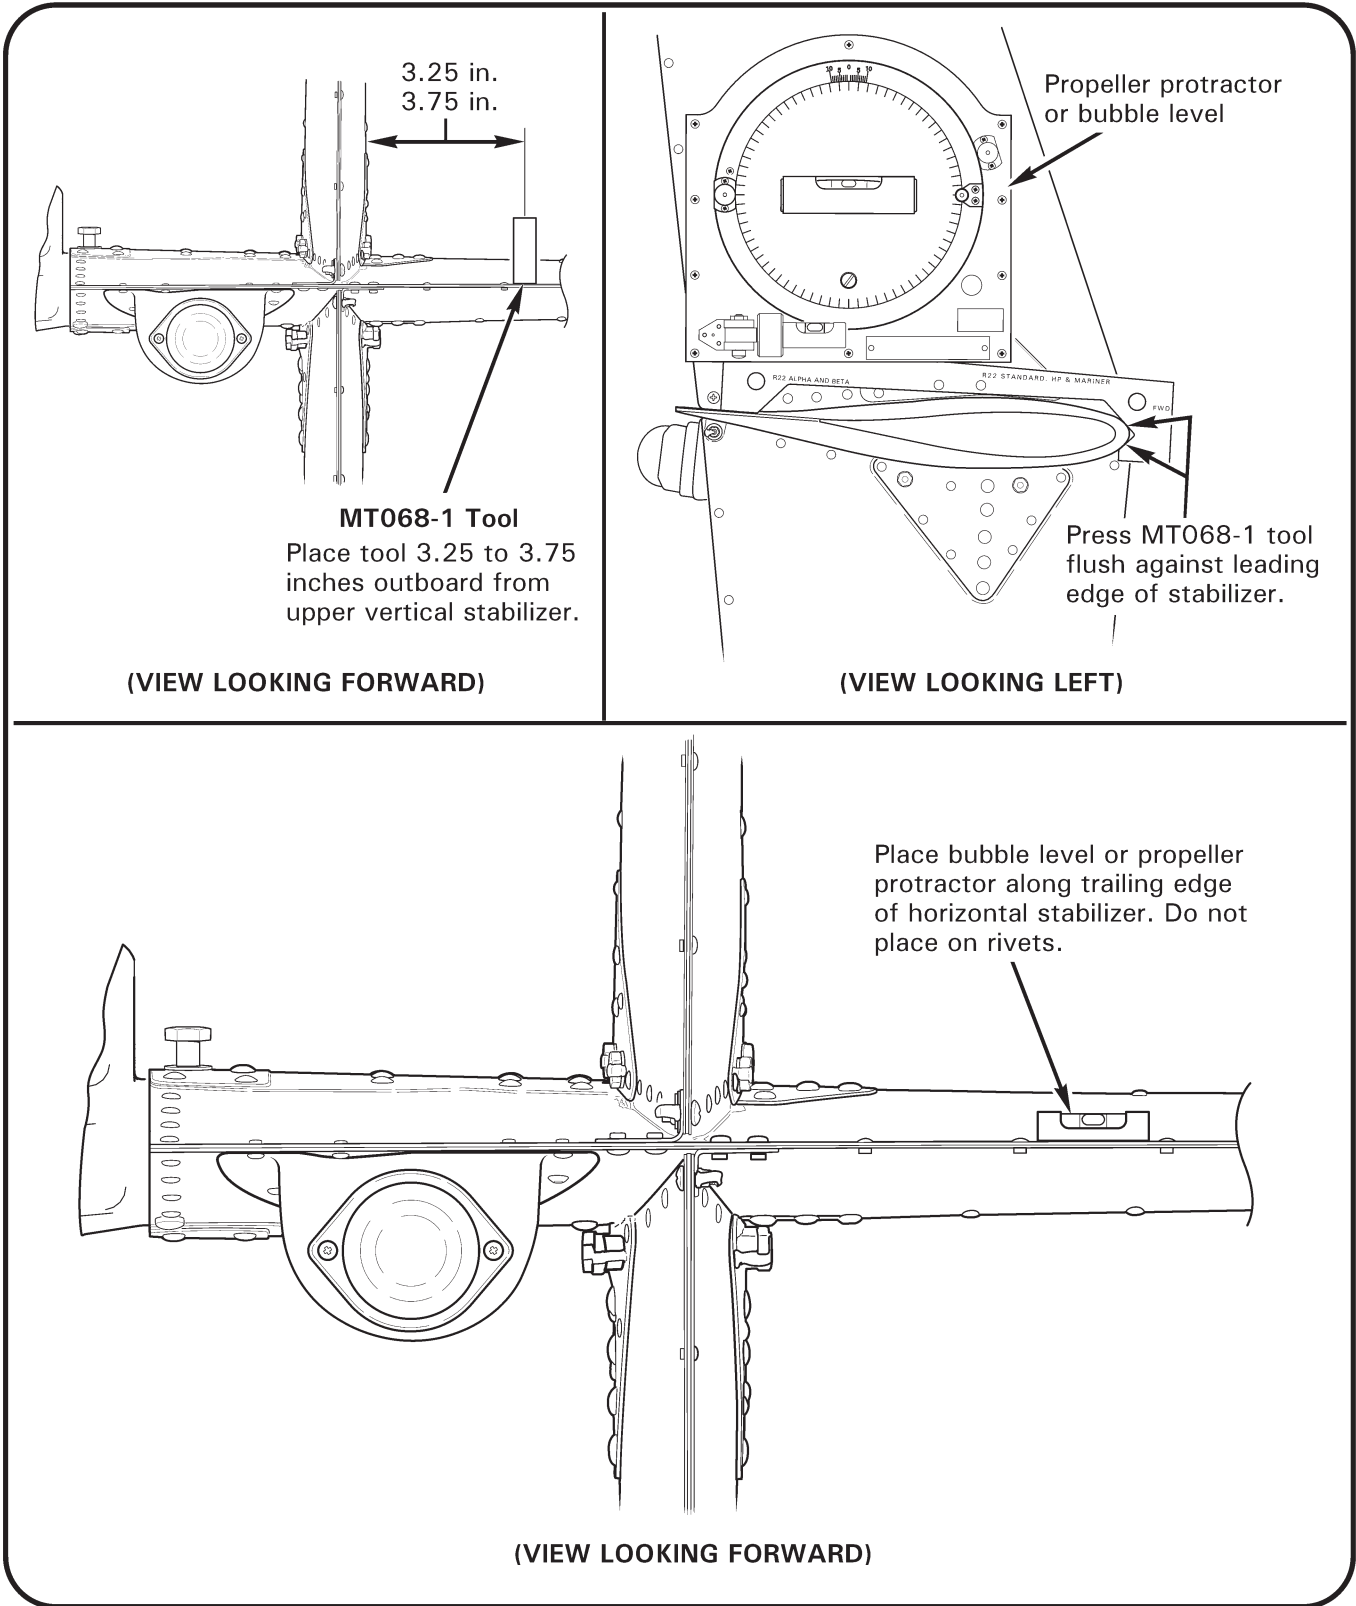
EMPENNAGE ASSEMBLY REPLACEMENT
